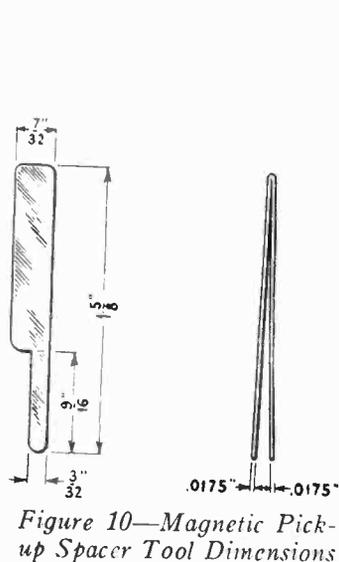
Magnetic Pick-up Spacer Tool Dimensions
